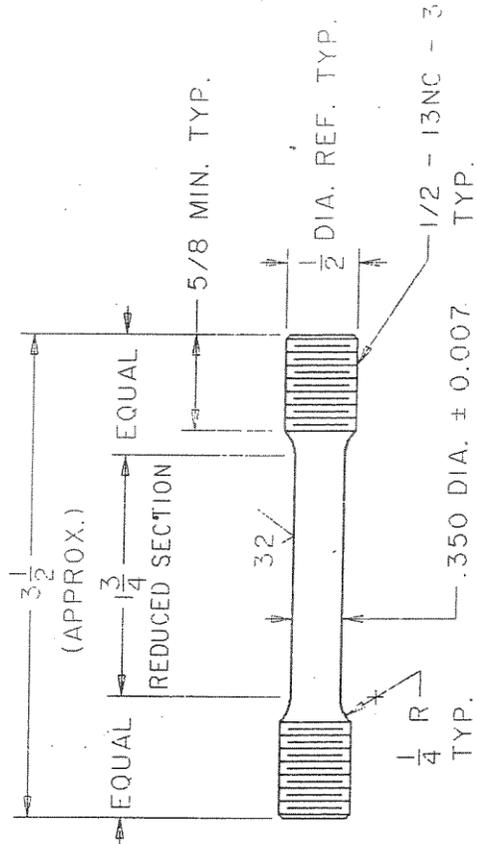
Design of transverse tensile test sample in GMA welds.
